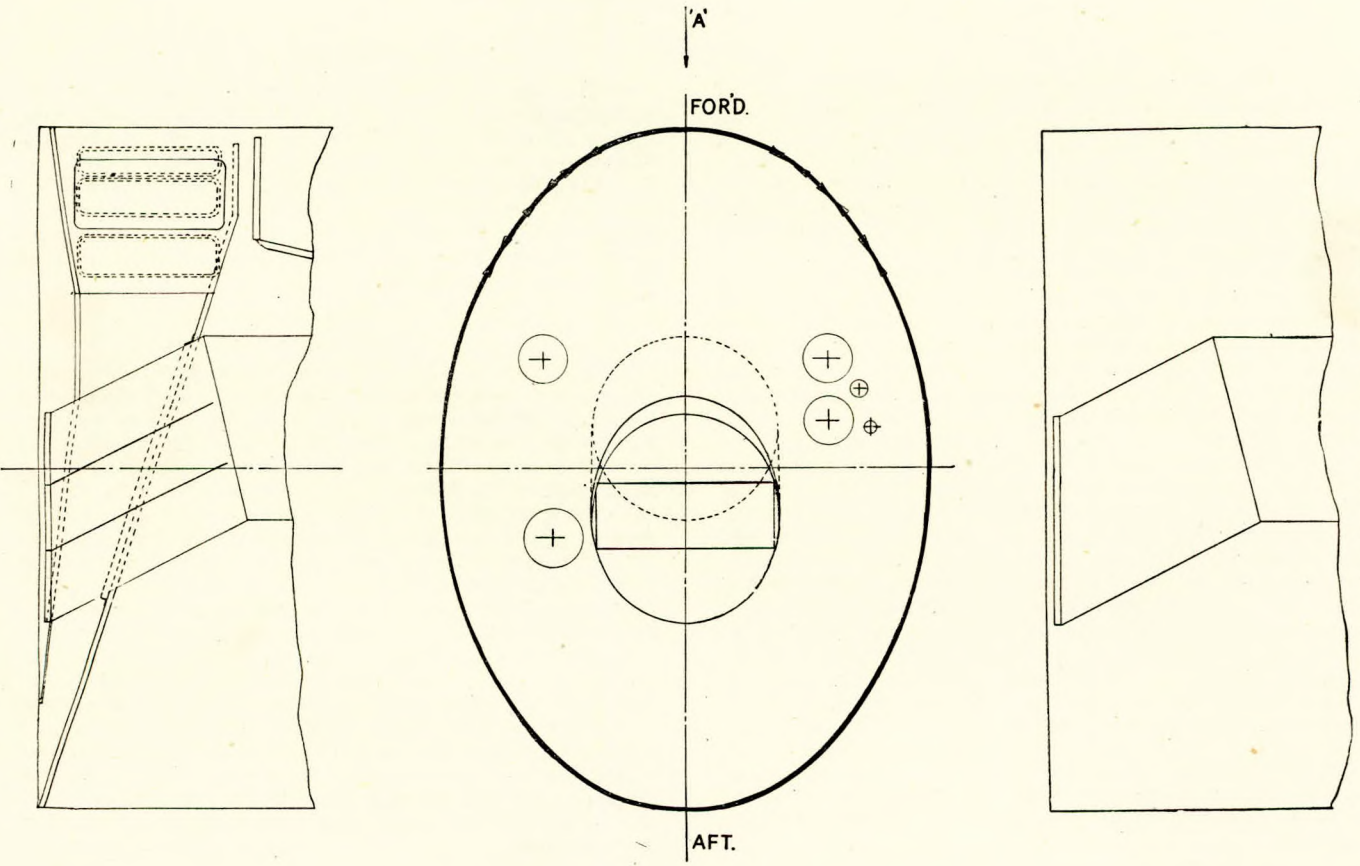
A.—ORIGINAL FUNNEL ARRANGEMENT
